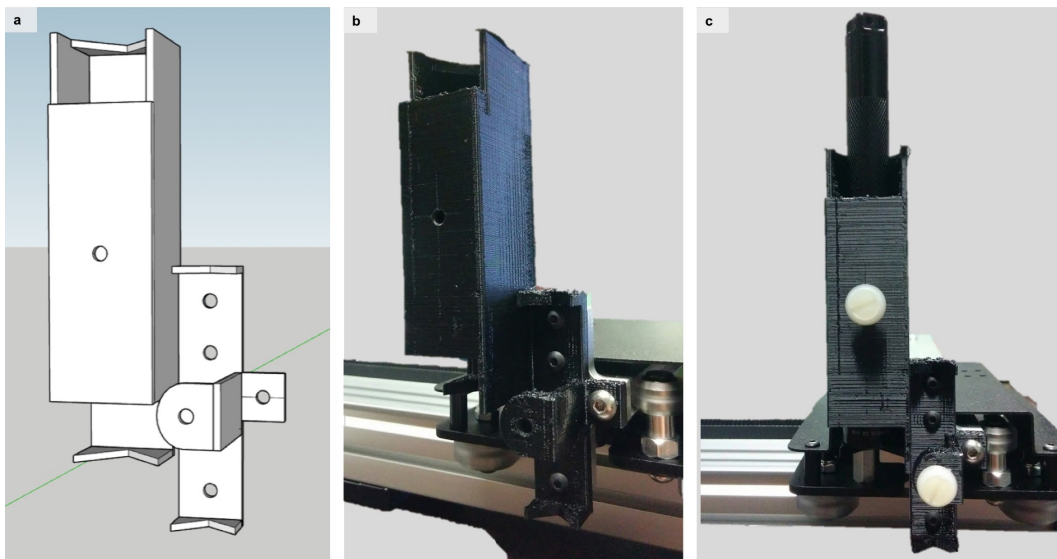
(a) The FO mount designed in SketchUp; (b) the 3D printed mount assembled onto the Axidraw V3 scanning arm; (c) the excitation source in the mount box, with plastic stabilizing screws for the light and FO cable in place.
